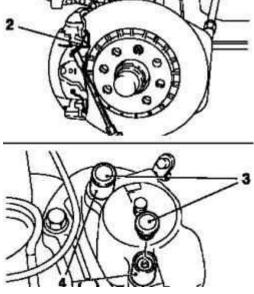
Removing the front brake components: 1 - sensor pads brake pads, 2 - retainer spring lever, 3 - dust caps, 4 - protective sleeve guide bolts
